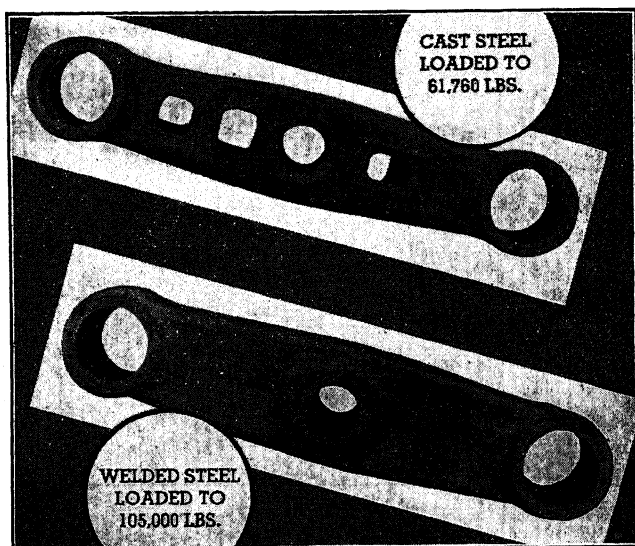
Supported at both ends and loaded at the center, the cast steel rocker beam failed at 61,760 lbs. Under the same set-up, the welded steel design withstood a loading up to 105,000 lbs. The weight and cost of each is practically the same.
